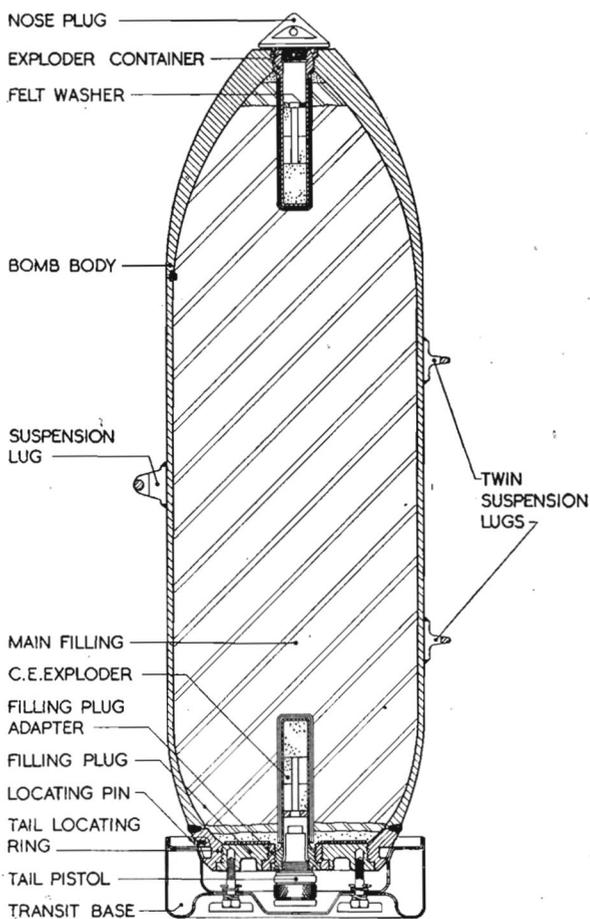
Sectional view of Mk. VII bomb fitted with No. 29 transit base and No. 36 nose plug
